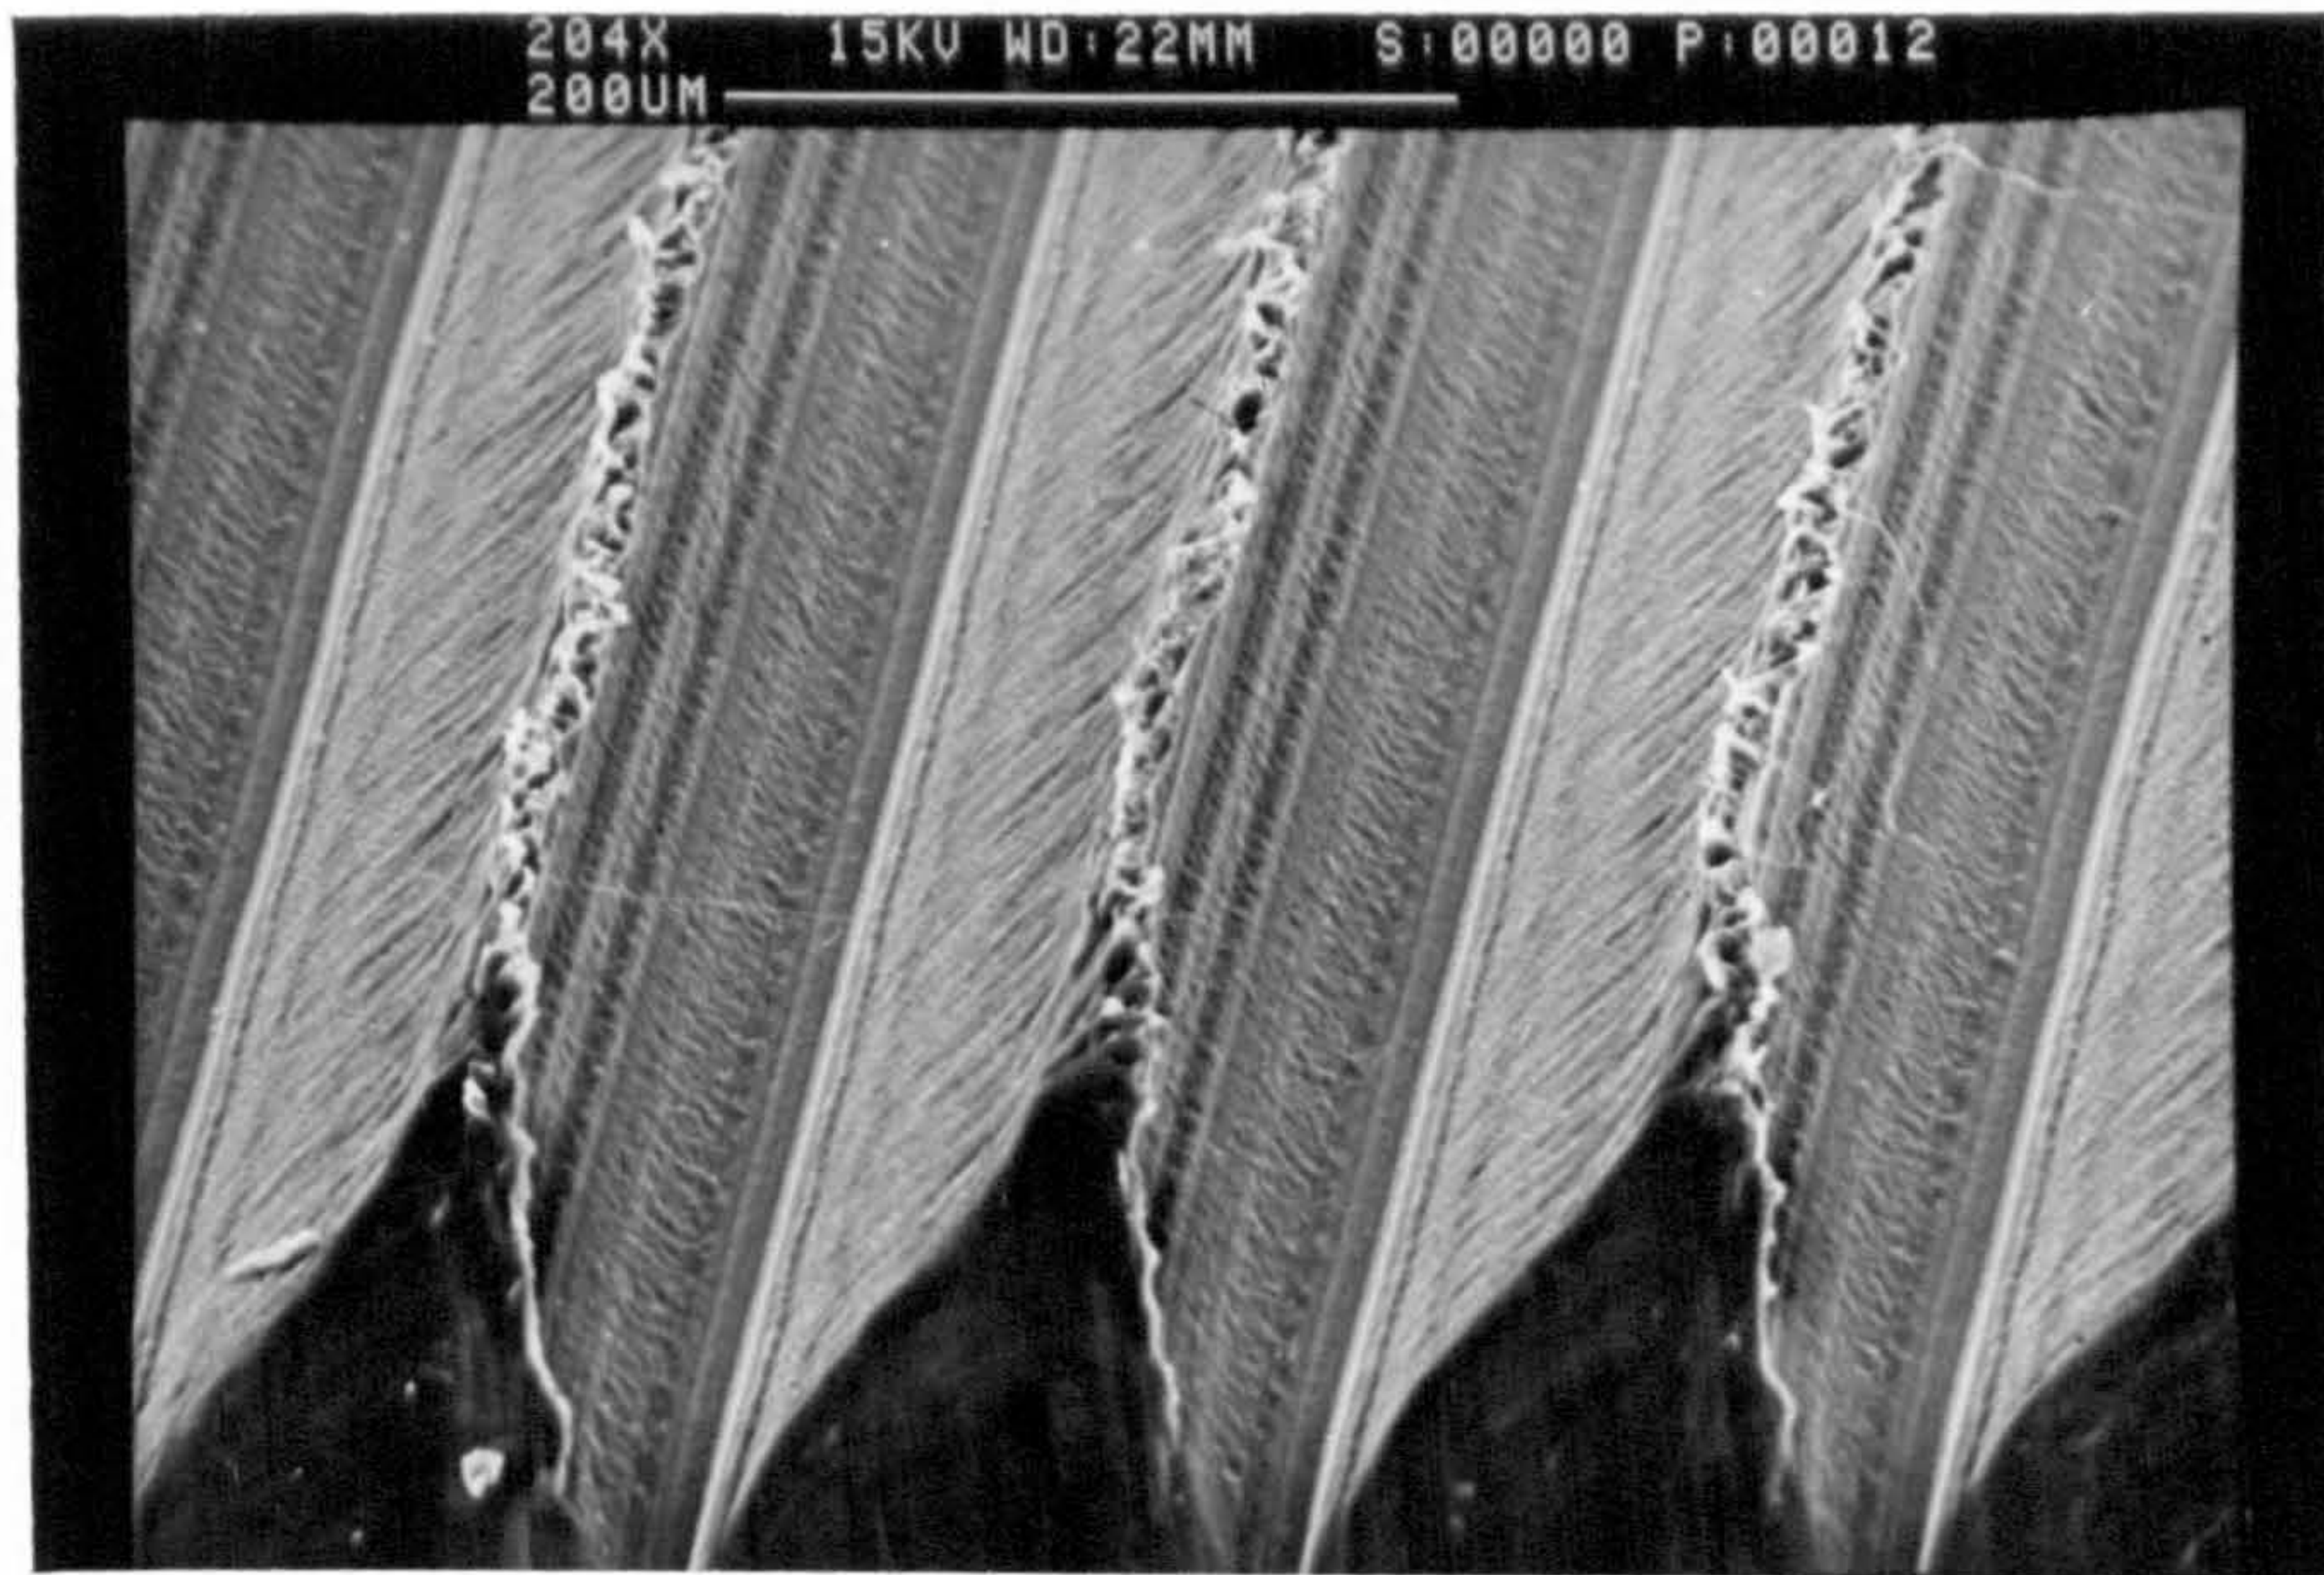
HDPE surface machined at  $30^\circ$  rake angle. (Speed = 250 m/min, feed = 0.16 mm/rev)
